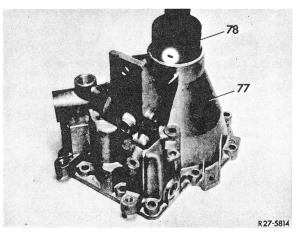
77 Rear transmission case 78 Assembly mandrel 108 589 02 43 00
